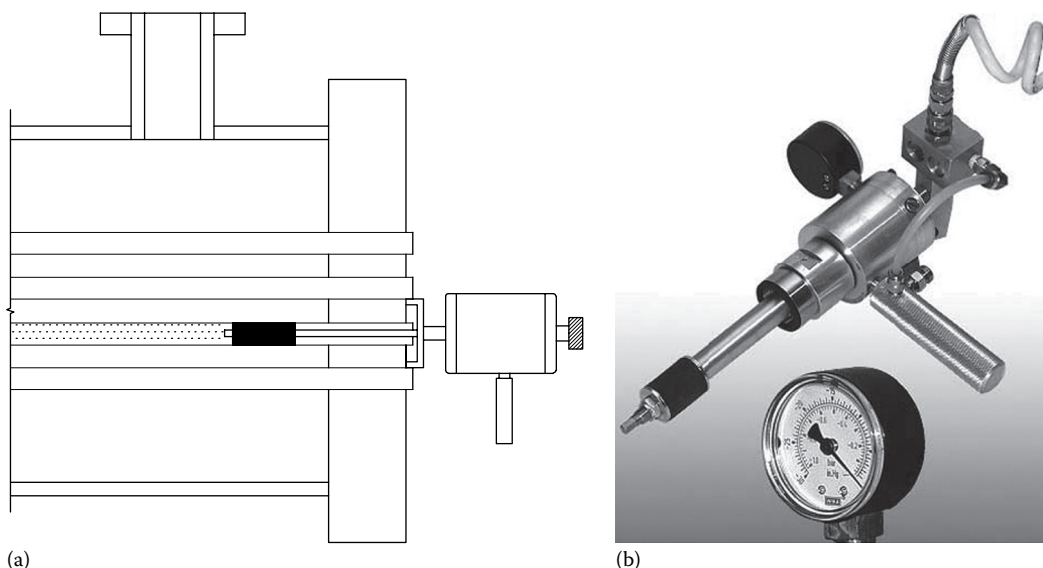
(a and b) Rolled tube-to-tubesheet joint testing vacuum gun. (Courtesy of Maus Italia F. Agostino & C.s.a.s., Bagnolo Cremasco (Cr), Italy.)
